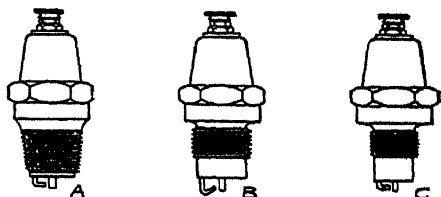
Types of spark plug screw threads. (A) $\frac{1}{2}$ -in. taper thread. (B) $\frac{7}{8}$ -in., 18-thread, S. A. E. standard. (C) Metric thread.
